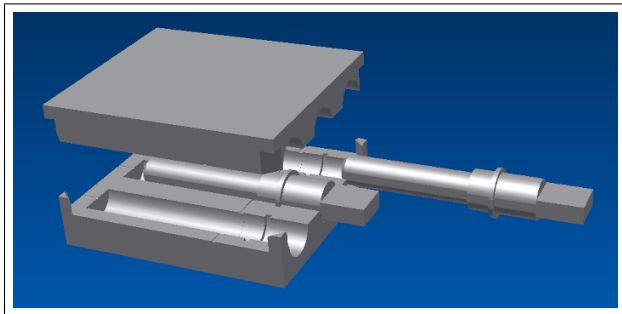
Step one of the manufacturing process – molding a 0.5mm silicone layer on the chamber core rods
